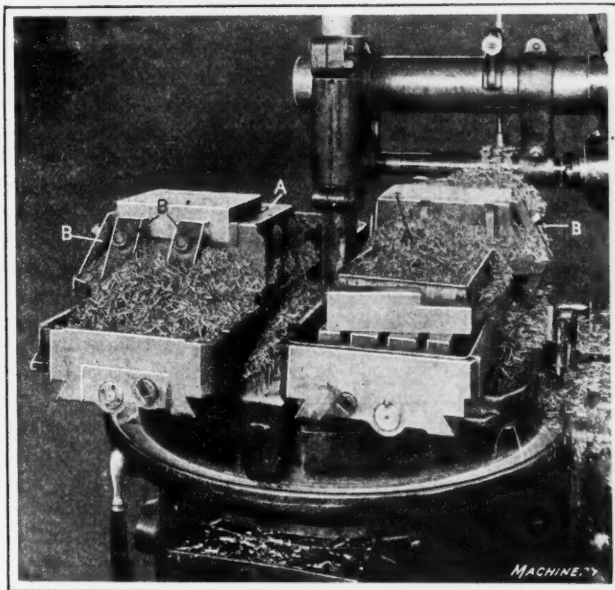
Indexing Rotary Milling Machine on which the First Operation is performed on the Turret Revolving Pawl Block
